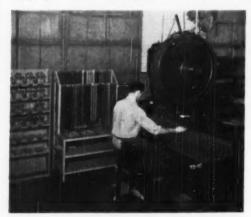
PUNCH PRESS SET UP FOR PERFORATING APPARATUS OPEN-INGS IN CHANNEL-TYPE MOUNTING PLATES
